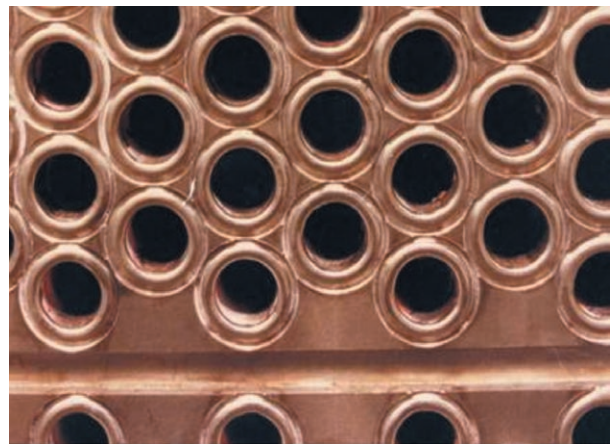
CS/titanium explosively clad tubesheets welded to titanium tubes.
